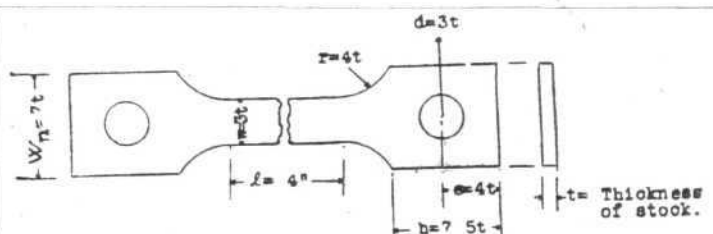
I.A.S.B. standard tensile test specimen for sheets.
